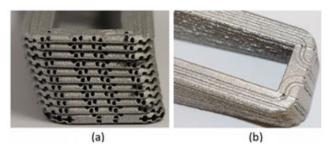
The aluminum tooth coil with integrated cooling passages (a) side view shows the cooling channels, and (b) top view of tooth coil [68].
